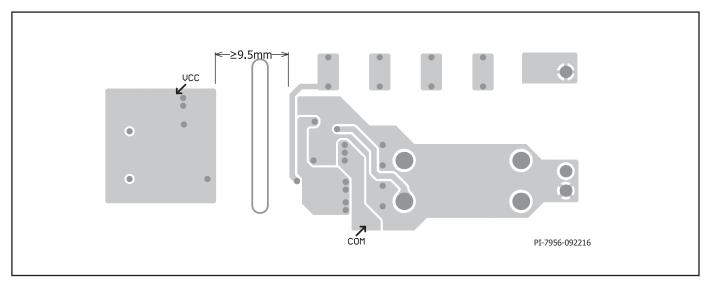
Bottom View of Recommended PCB Layout. Corresponds to Schematic Shown in Figure 13.
